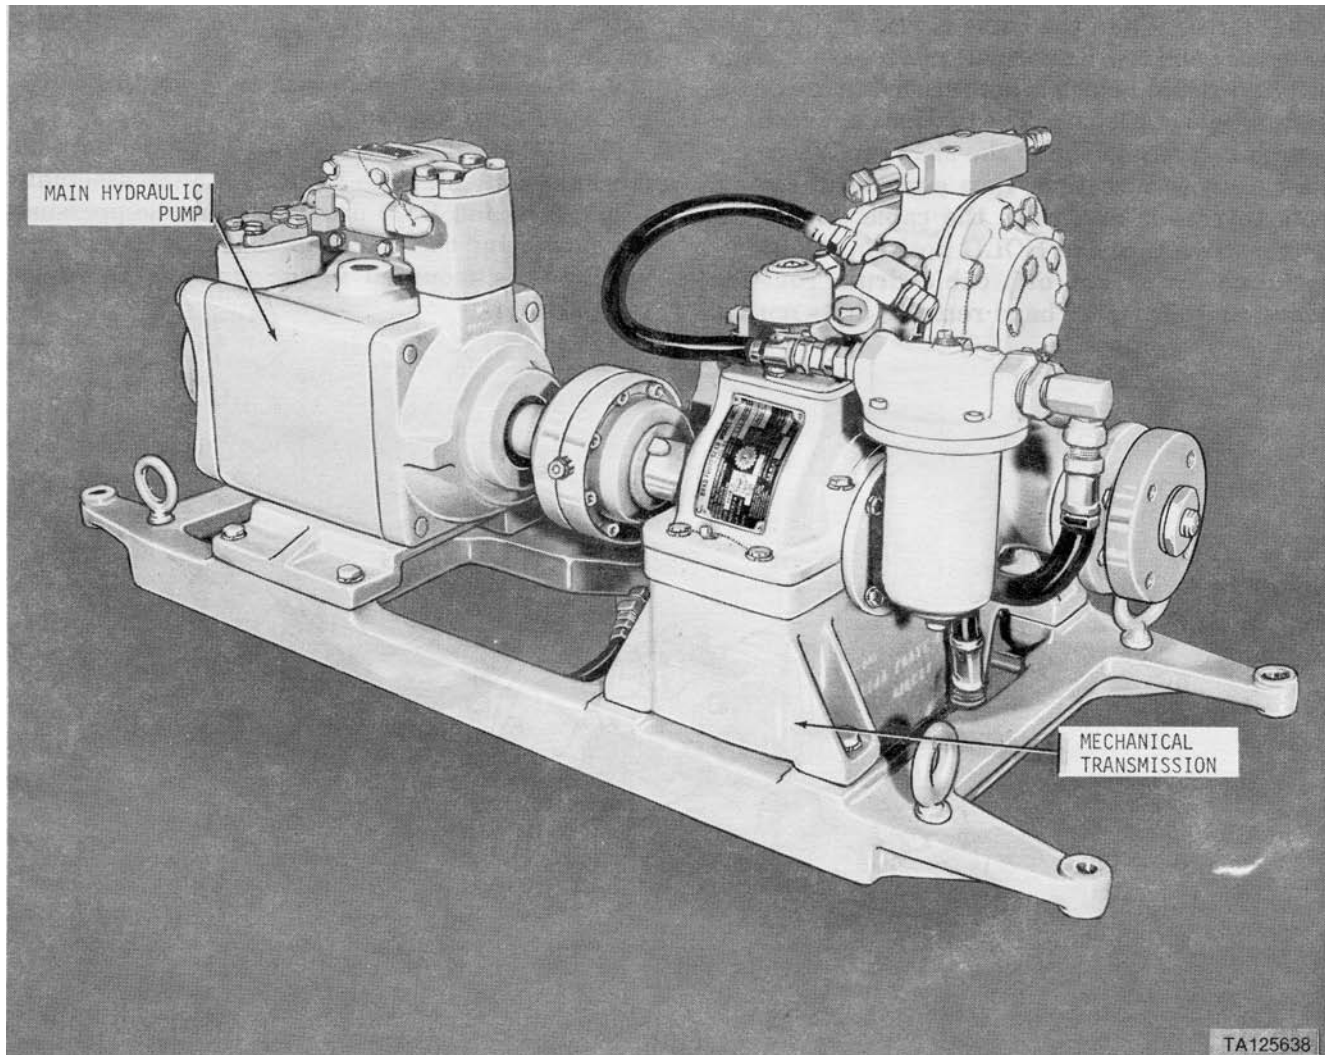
Mechanical transmission and main hydraulic pump assembly—right rear view.
